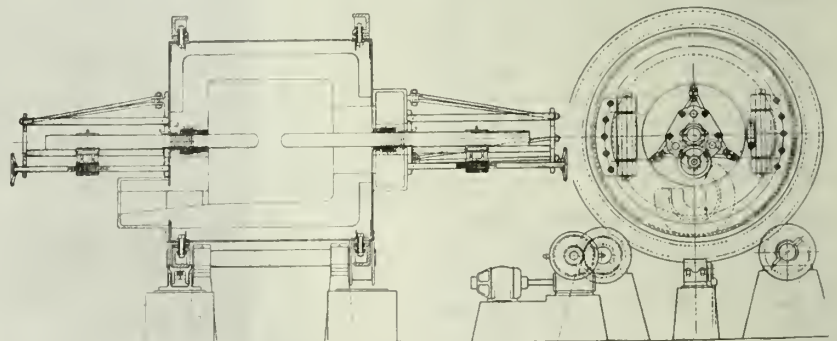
CROSS SECTION AND END ELEVATION OF FURNACE.
